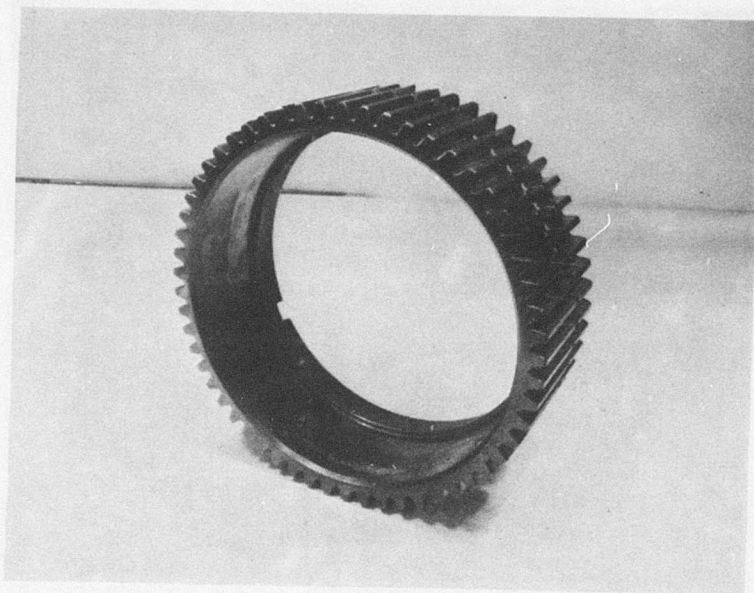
Upper sun gear following 4.0-hour emergency lubrication run.
